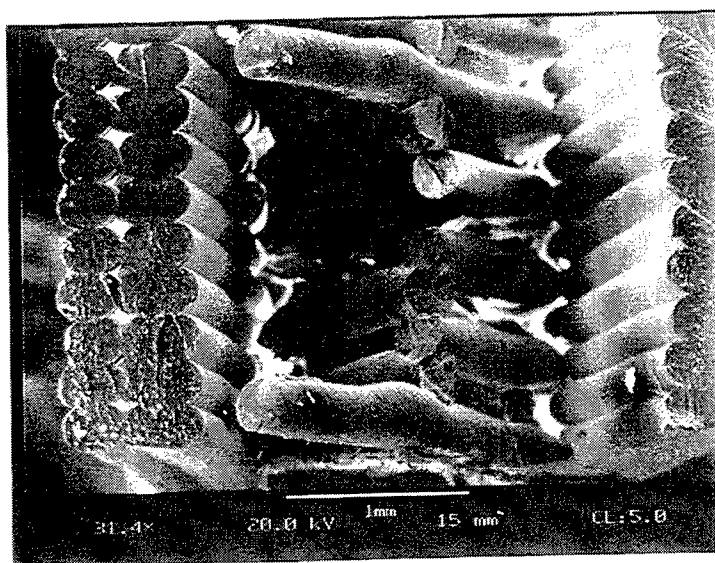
Fracture surface of FDM constructed ABS tensile sample.
